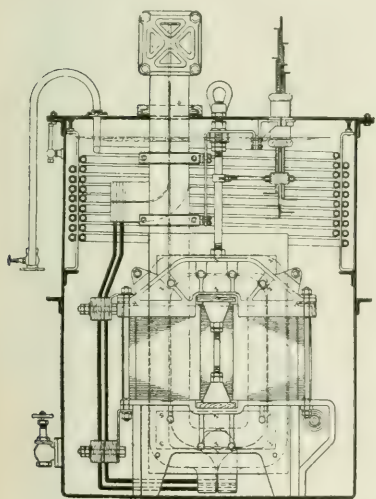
SINGLE-PHASE, 1,250 K.V.A. SHELL-TYPE FURNACE TRANSFORMER, 1 1/2 TURNS ON L.T. WINDING.
